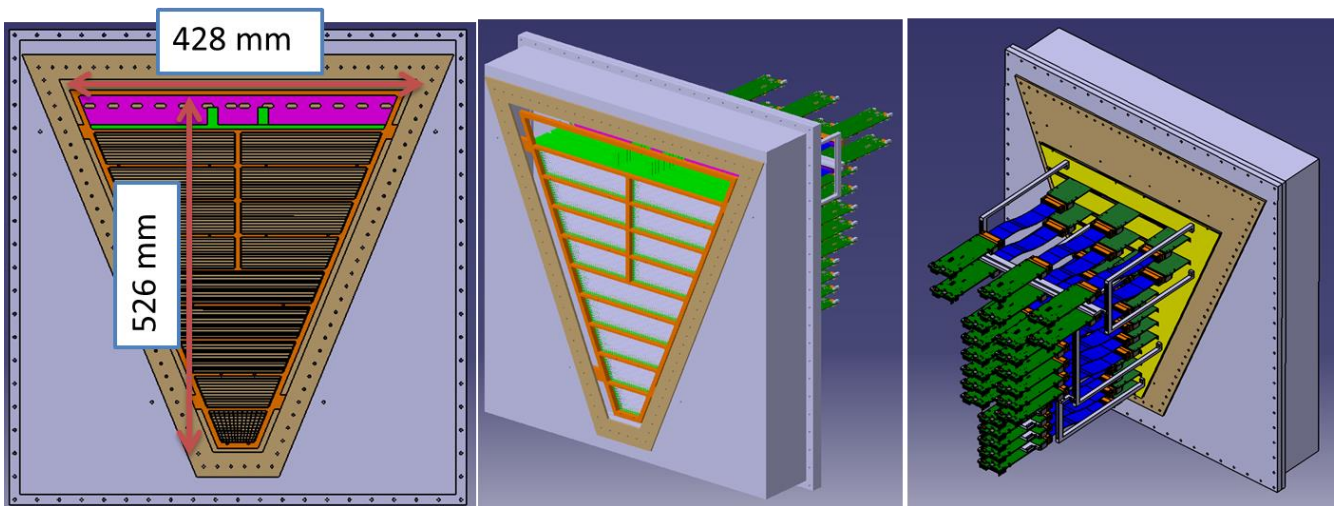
CAD model of the full module detector: Front side view (left panel) and isometric view showing the front side (central panel) and the rear side of the detector with the readout electronics (right panel). Neutrons enter from the front side of the detector.
